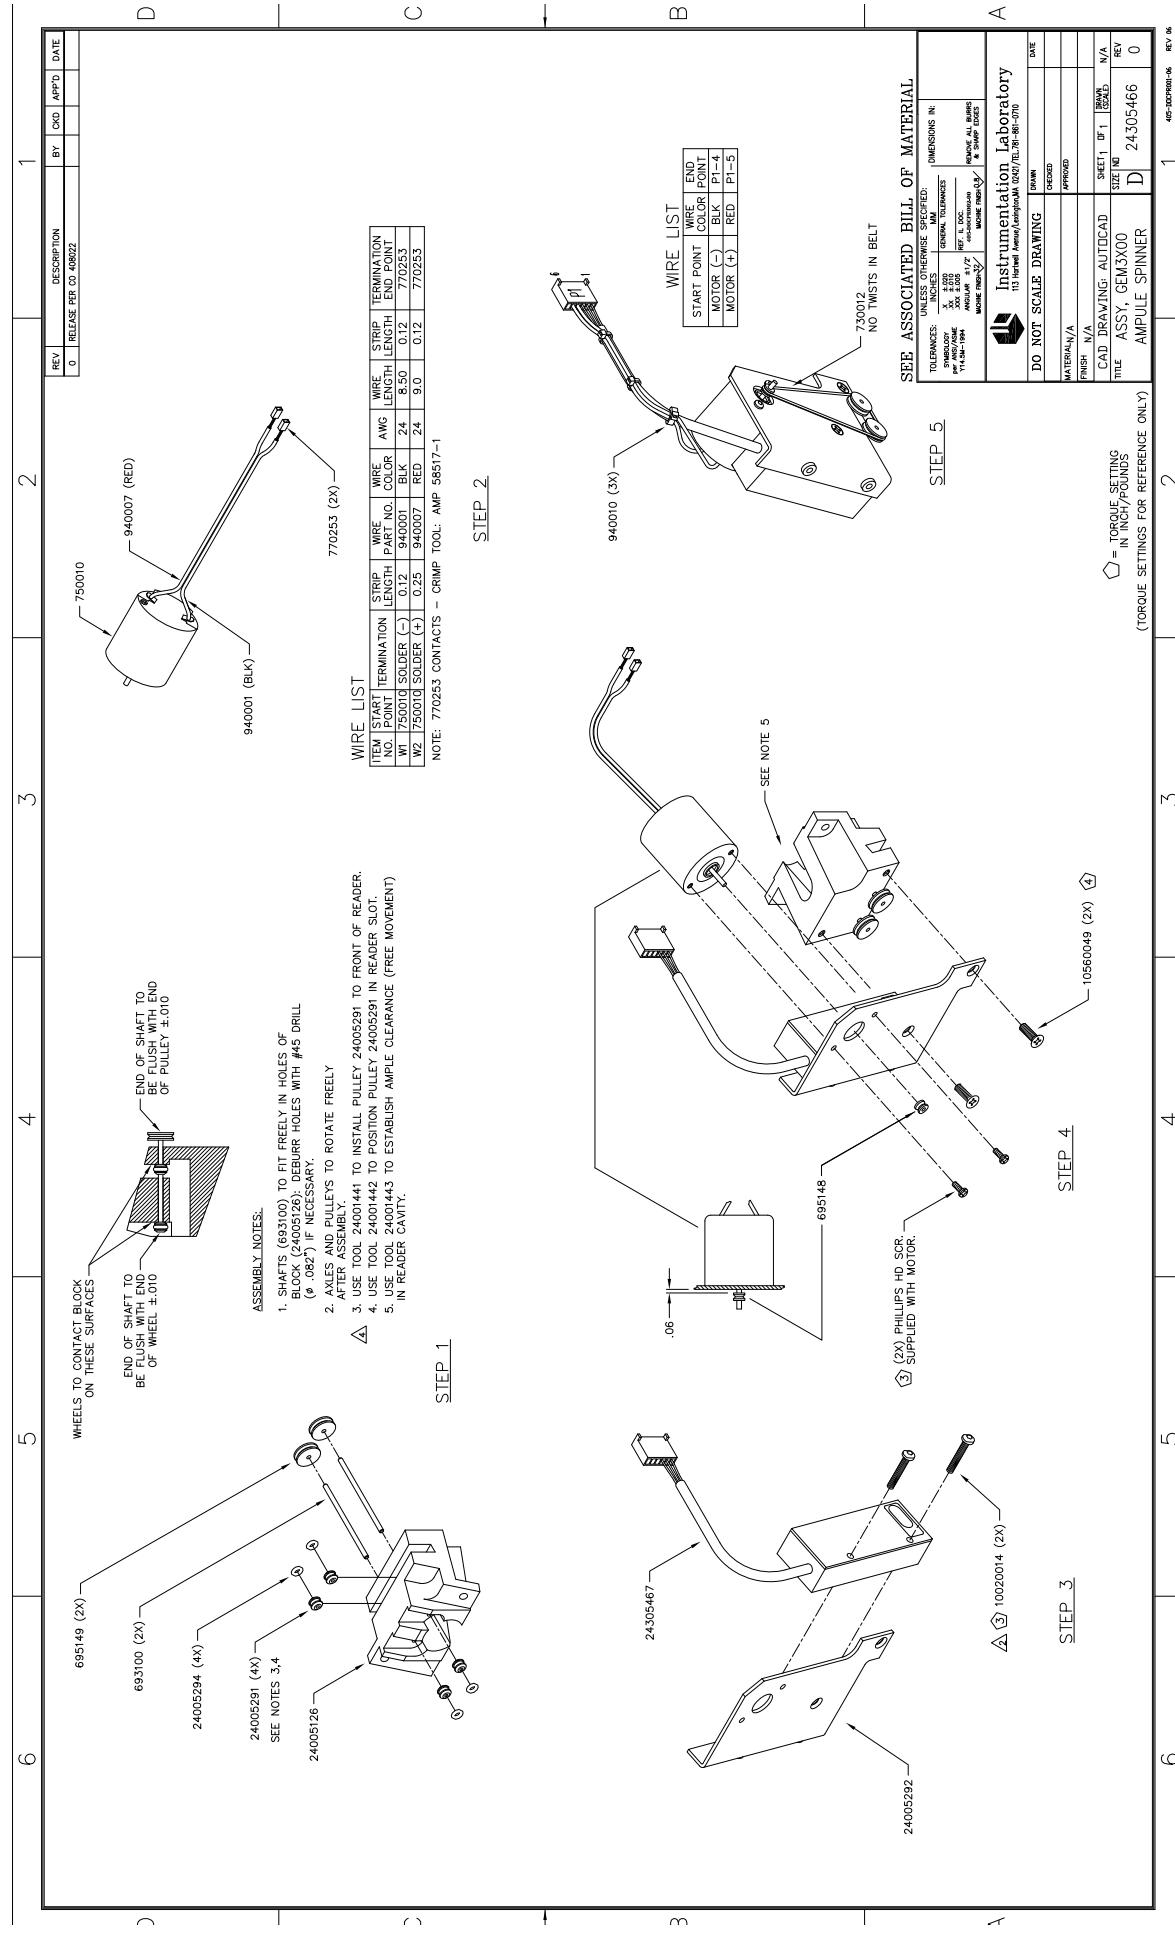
00024305466 GEM 3X00 AMPOULE SPINNER
